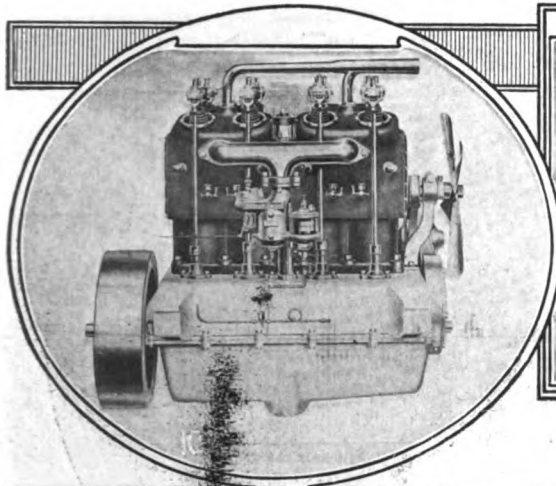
Intake side of the Stoddard-Dayton valve-in-the-head motor, showing the carburetor with special air valve regulated by lever from the steering post
